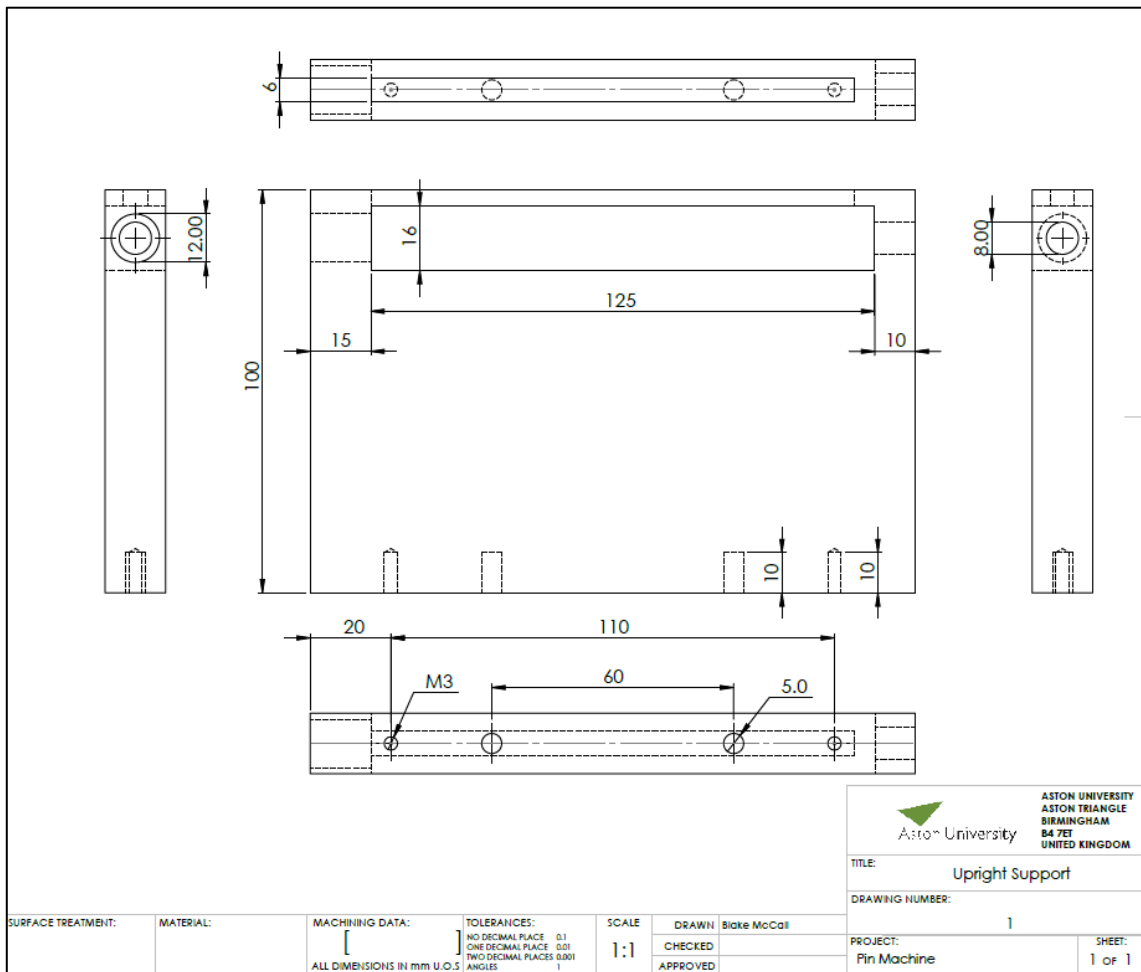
Working drawings of the Upright Support Component of the Pin Machine
